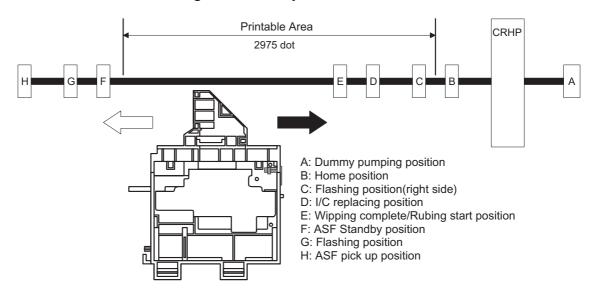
Major Ink Sequence Position on the Carriage Mechanism
